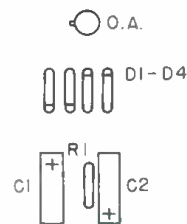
The component side view of the board shown in Figure 2. Again, scale is full sized. Note: O. A.—Vactec VTL-2C2; D1 to D4—1N4001; C1—1 μ F-500 μ F (see text) 3V d.c.; C2—50 μ F 6 V d.c.; R1—1k.
